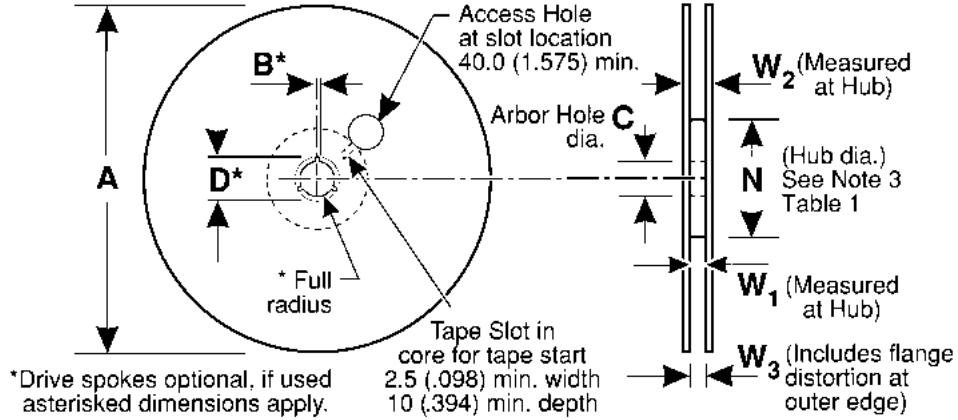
Reel Dimensions (Metric Dimensions will govern)
